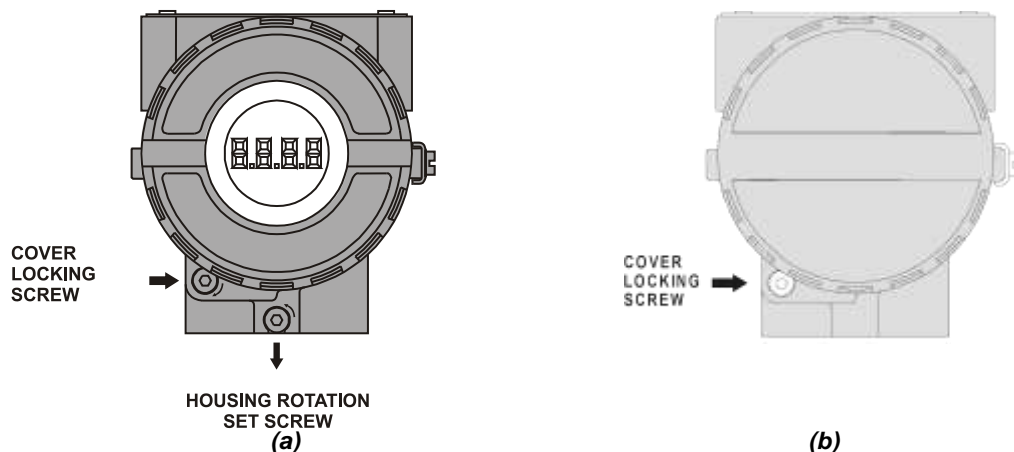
Cover Locking and Housing Rotating Set Screw (a) Electronic Board Side (b) Terminal Connection Side
